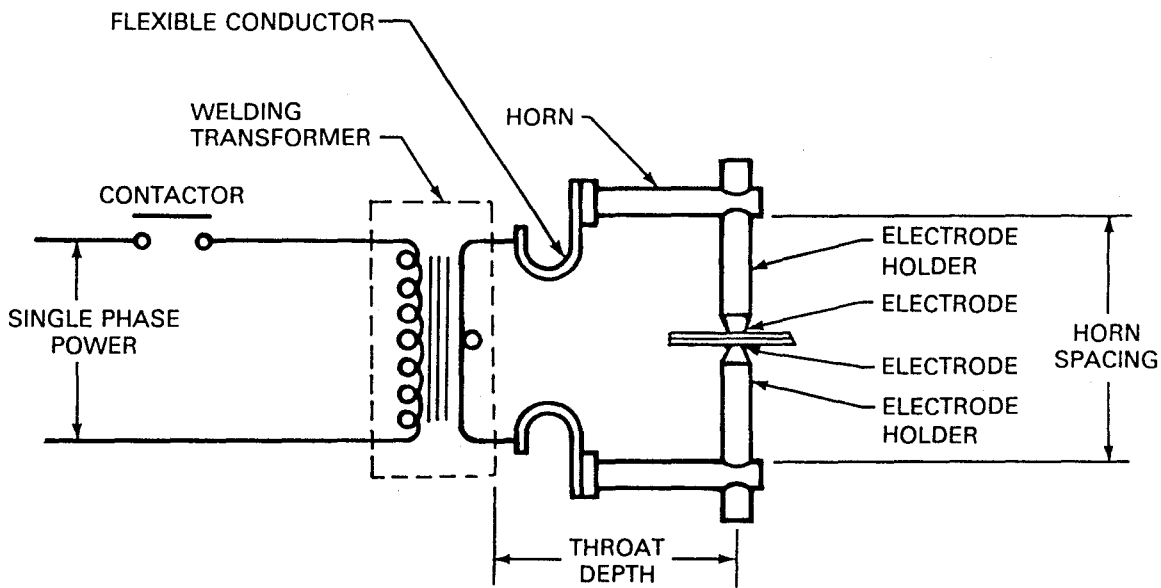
Typical Single-Phase Spot Welding Circuit
